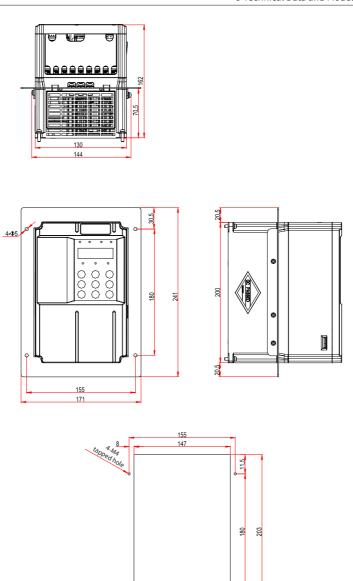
Mounting bracket dimensions and hole spacing for 3.7–5.5 kW AC drive models
